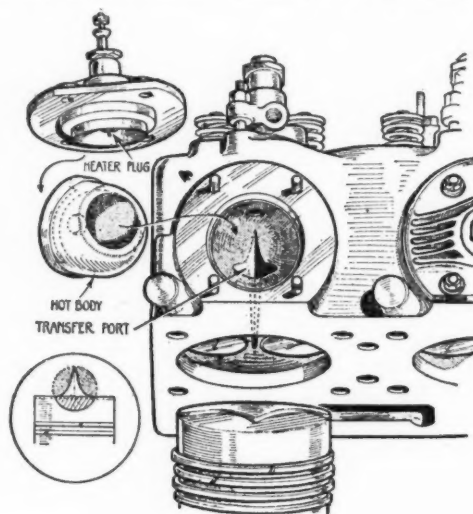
OMO COMBUSTION CHAMBER IN THE TANGE OIL ENGINE
